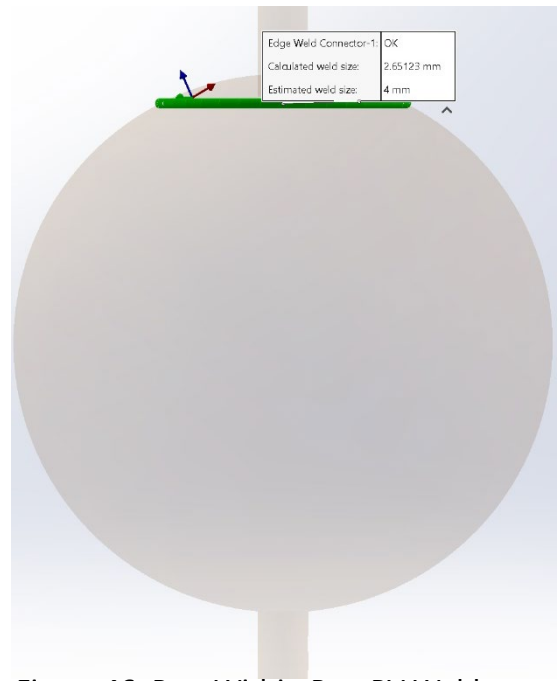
Part-Within-Part PV Weldment @ 737.5 PSI
